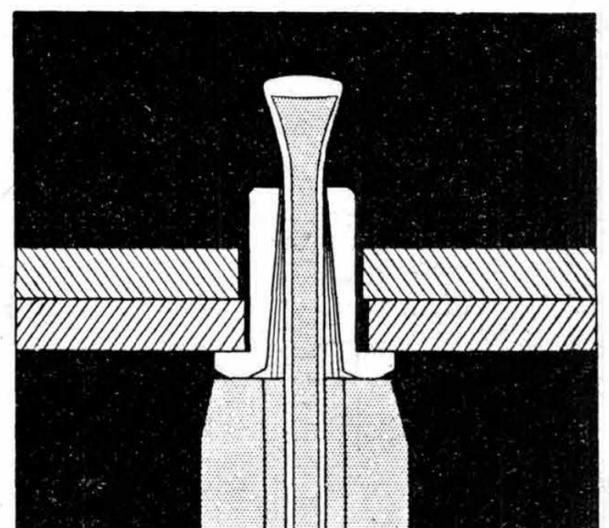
RIVET PLACED & READY FOR EXPANDING
